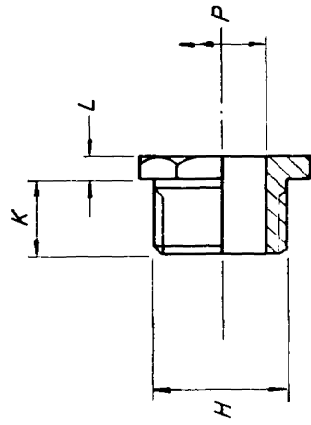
Head and gland of rising spindle type taps and valves (see Tables 3 and 4)
